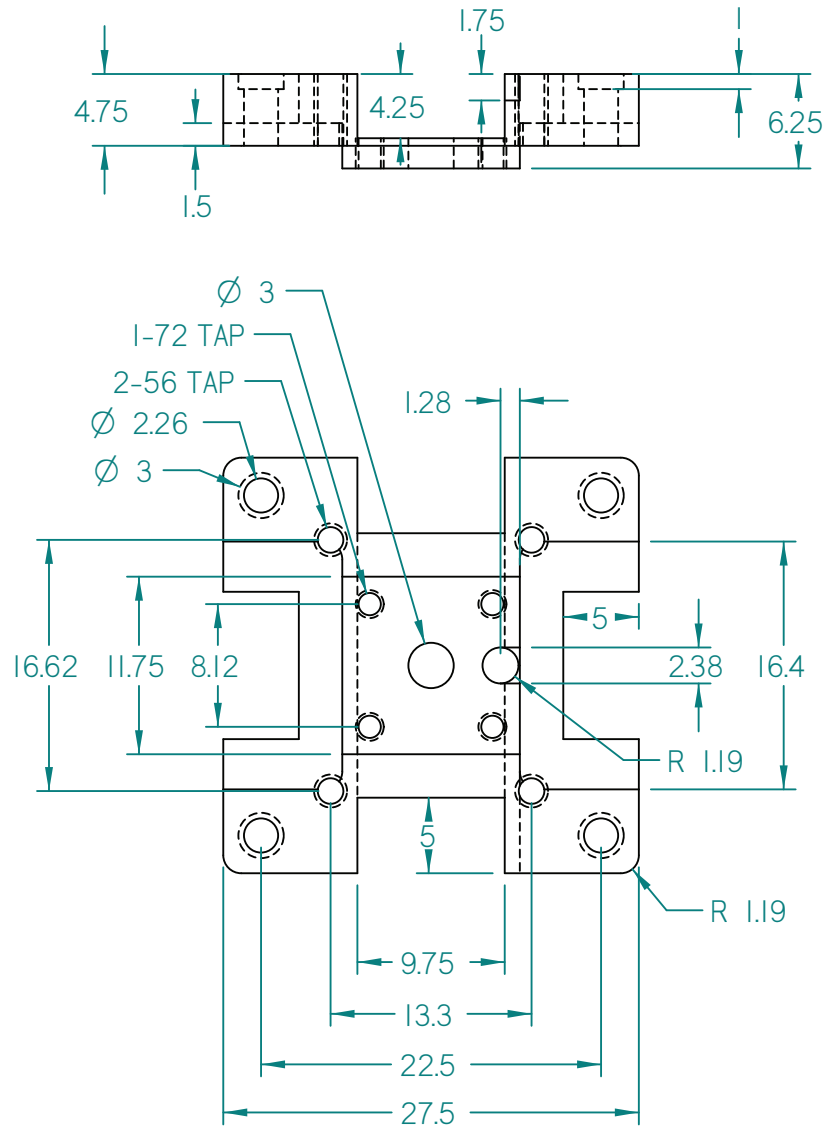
Short core frame dimensions (mm). Material: Brass. 2:1 scale.
